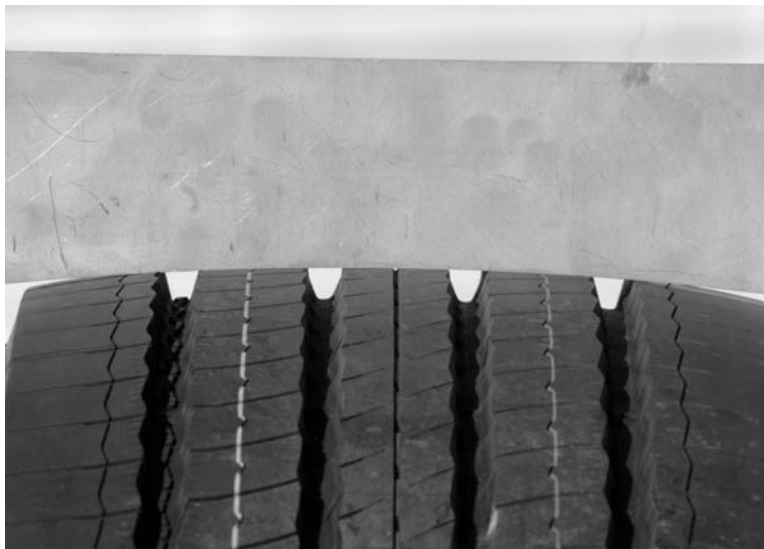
Measuring a Tread Radius using a Reference Radius Template
